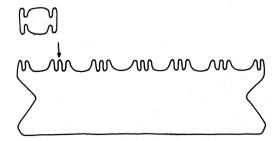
Suggested cross-section view of a mold for making "collared" beads with a finished bead shaped on such a mold just above it; the arrow indicates one of the ridges which formed a constriction where the segmented tube was subsequently cut apart.
